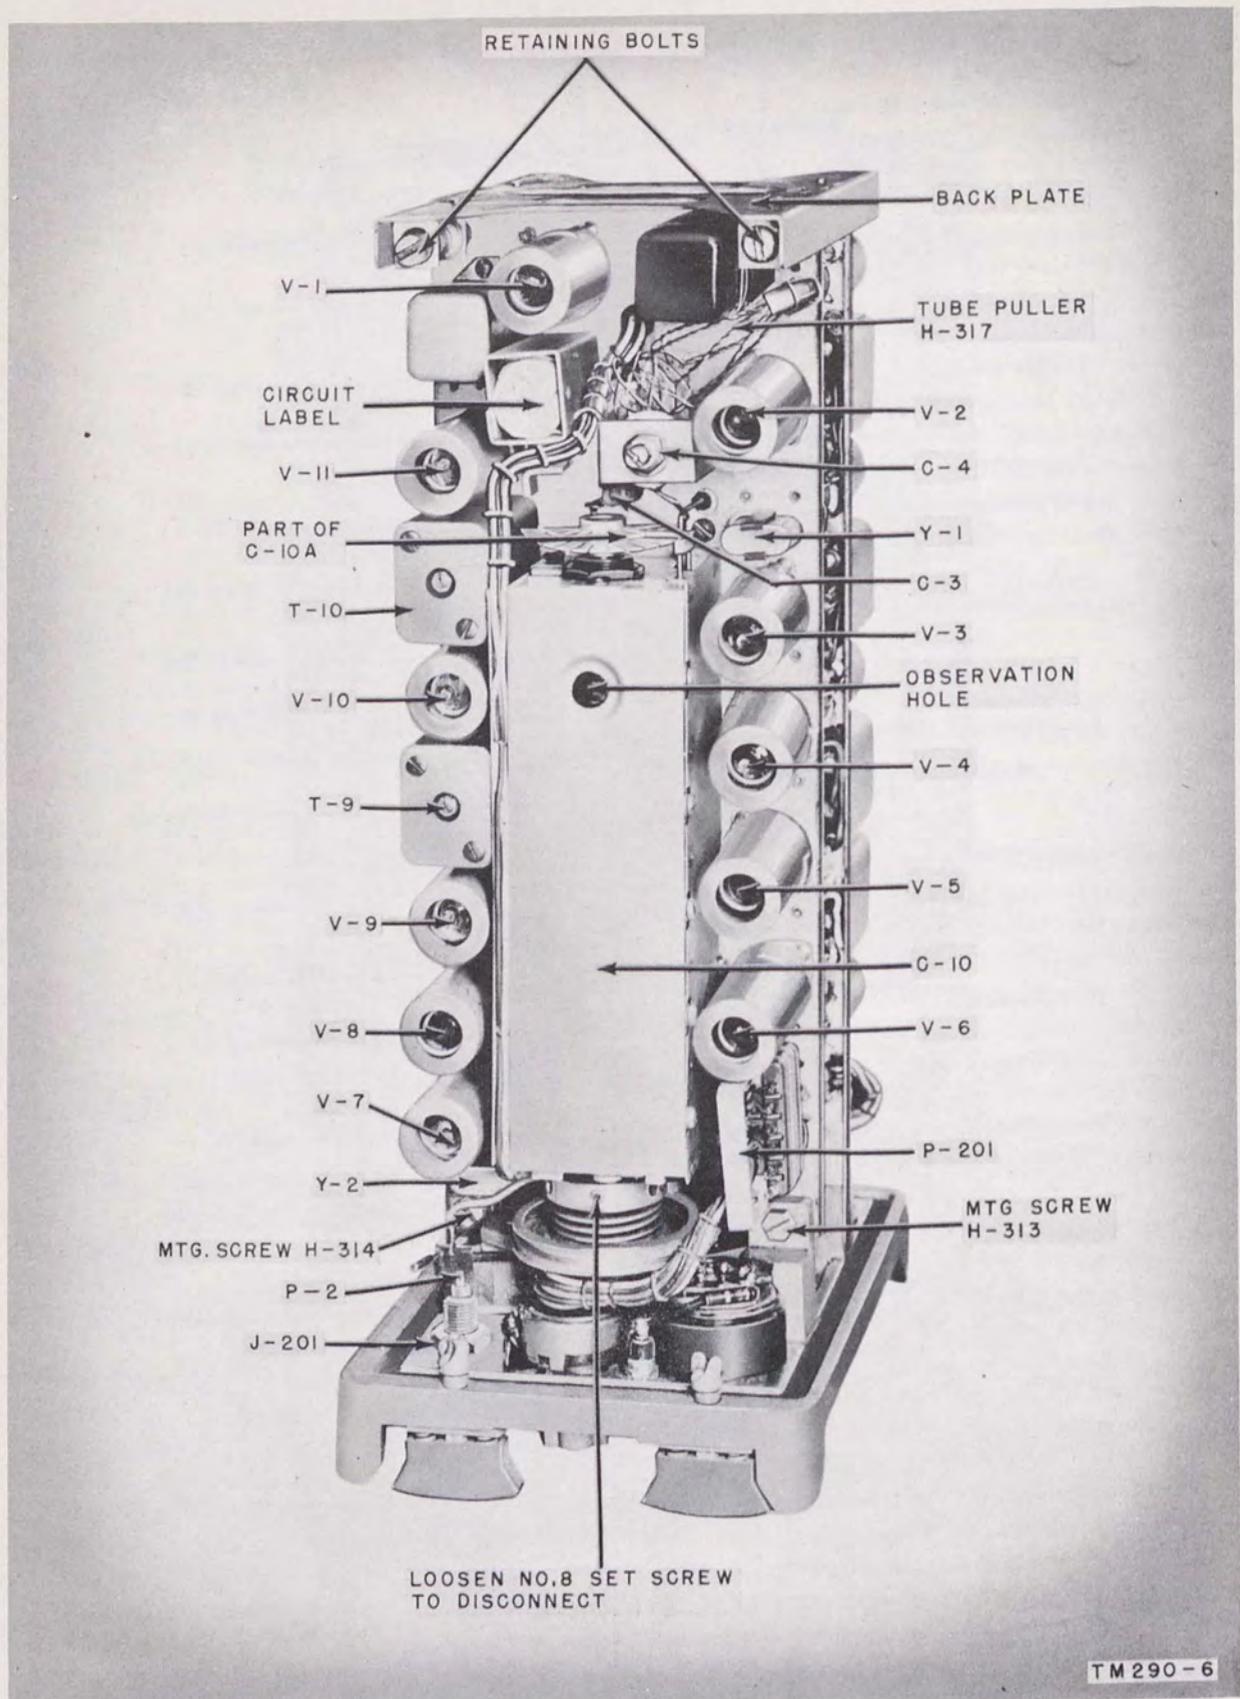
Receiver-Transmitter RT-70/GRC, case removed, view of r-f chassis (right side of panel-and-chassis assembly).
